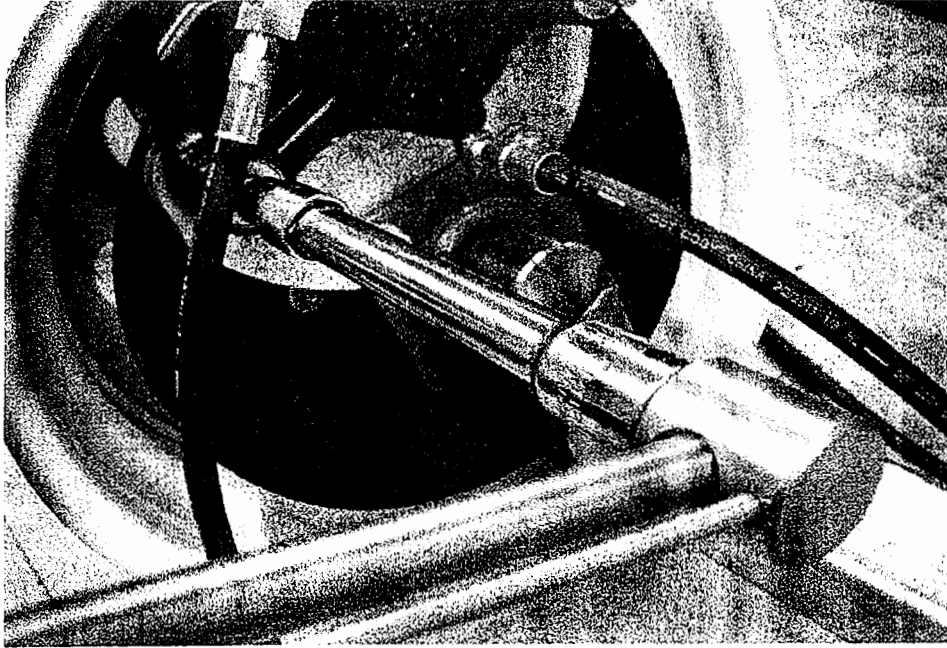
Completed Re-installation of Slider Pins. Correct Threadlocker Applied,
